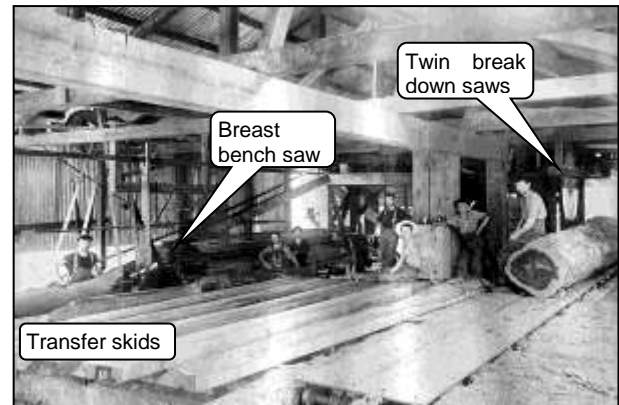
Typical native sawmill layout ~1910. Key technology elements are: the twin break down saws, fitch transfer skids and breast bench.
